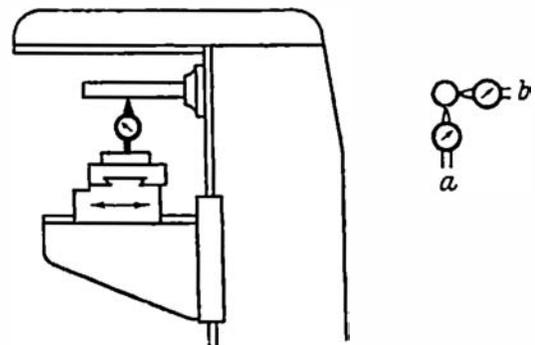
Transverse Movement of Table parallel with Spindle Axis
